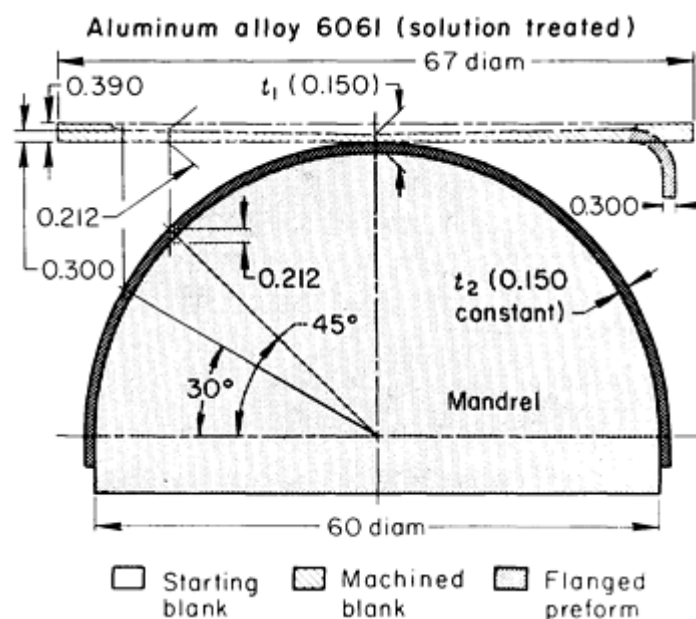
Hemisphere spun from a machined and preformed blank. Dimensions given in inches.
